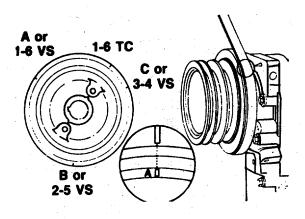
Aligning Pulley and Gear Pointer.
